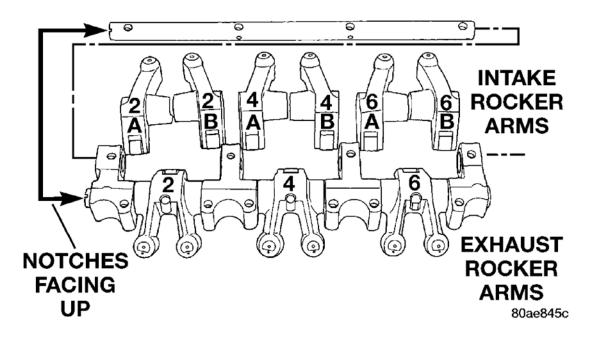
Rocker Arms & Shafts Courtesy of CHRYSLER LLC
